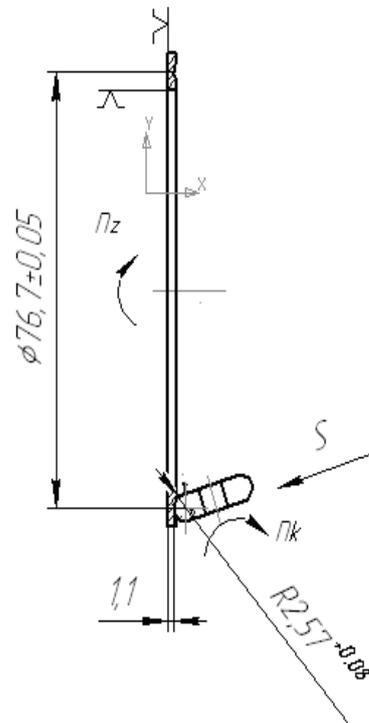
The traditional scheme of the grinding of the bearing races by the grinding wheel face in the form of a disk
